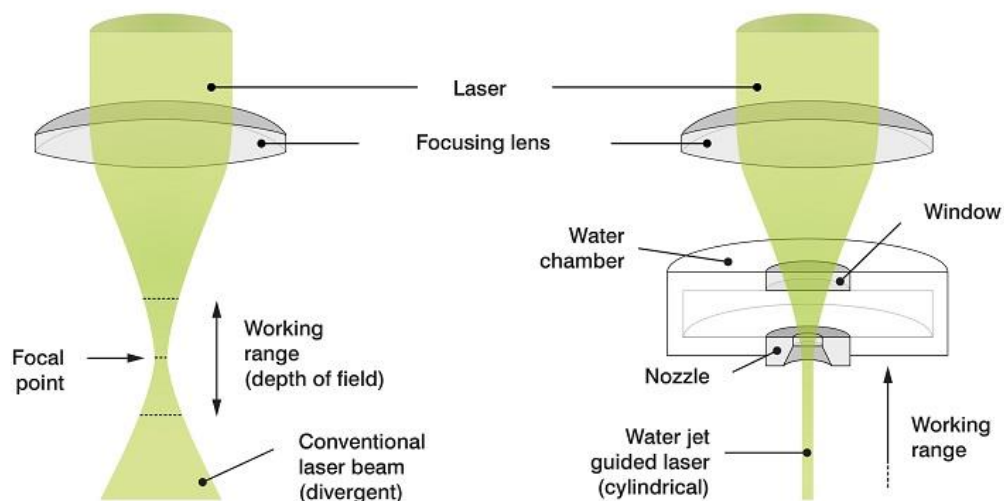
Left: Conventional laser beam, Right: Water jet guided laser beam [31]
